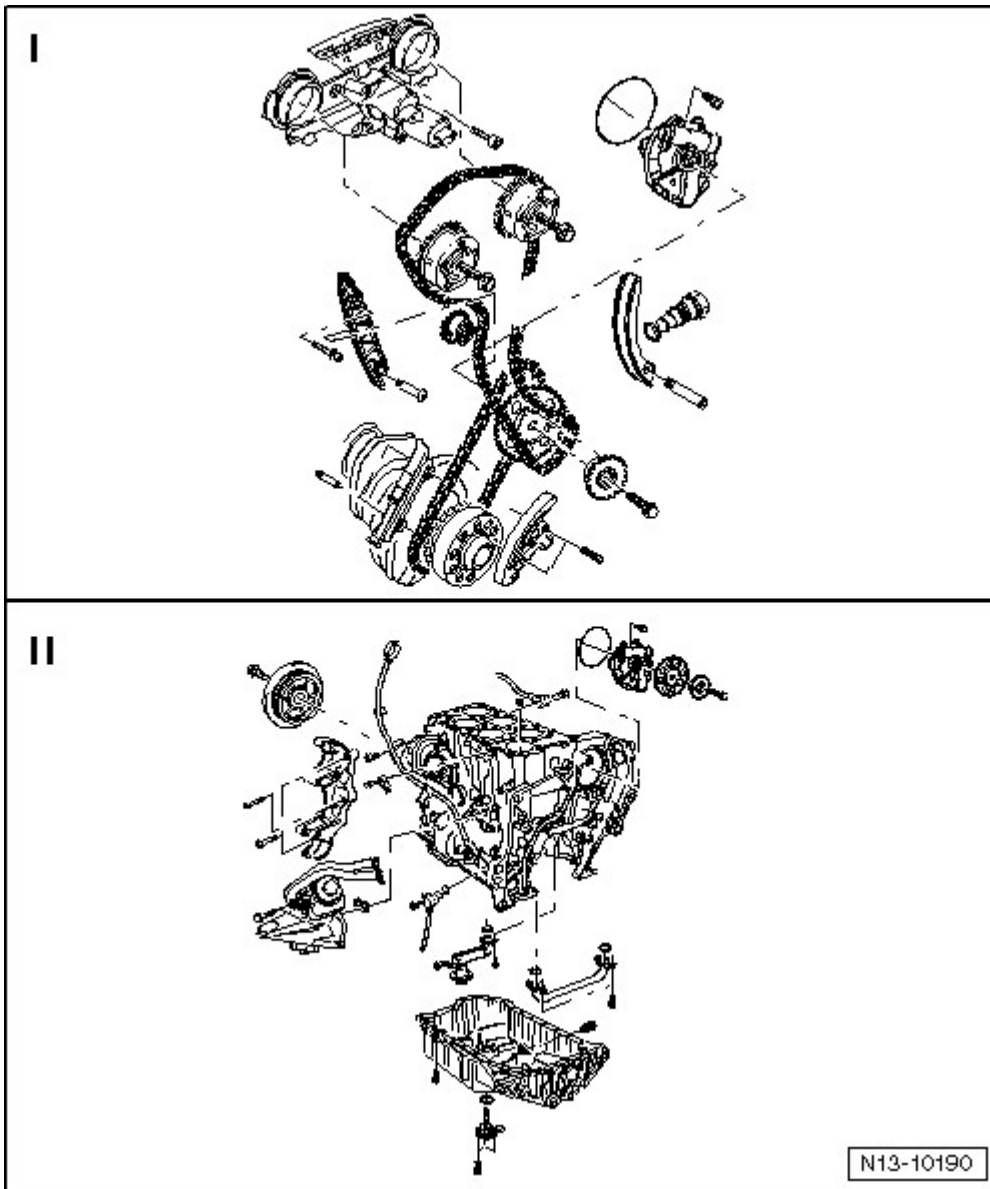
Identifying Engine, Disassembling And Assembling Overview
